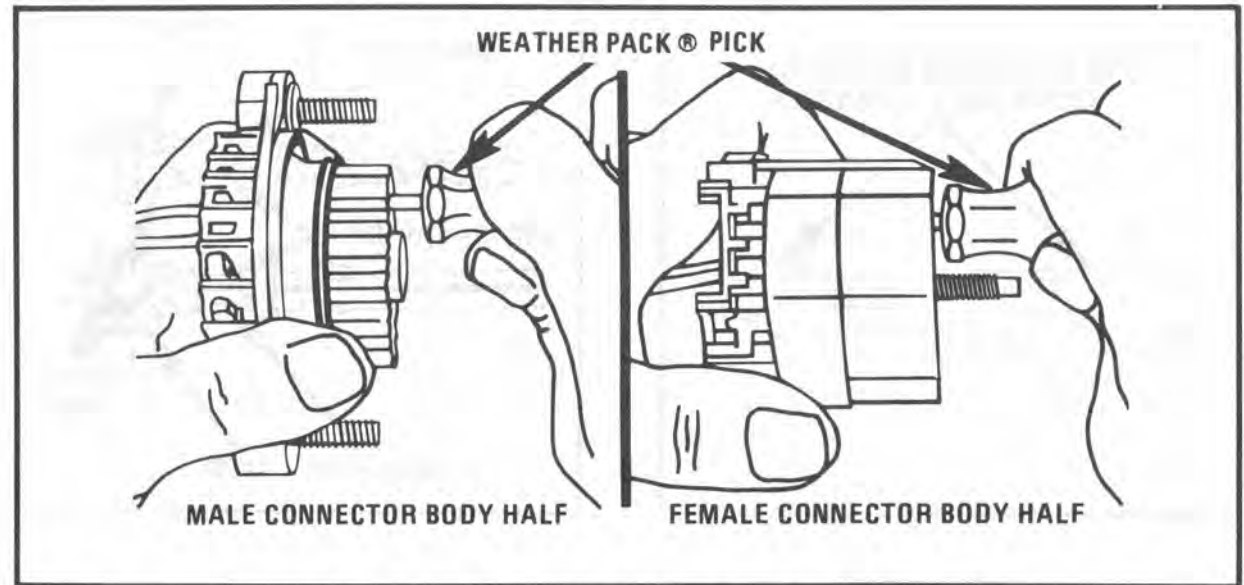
Releasing The Terminal Locking Tangs (Large Connector)
